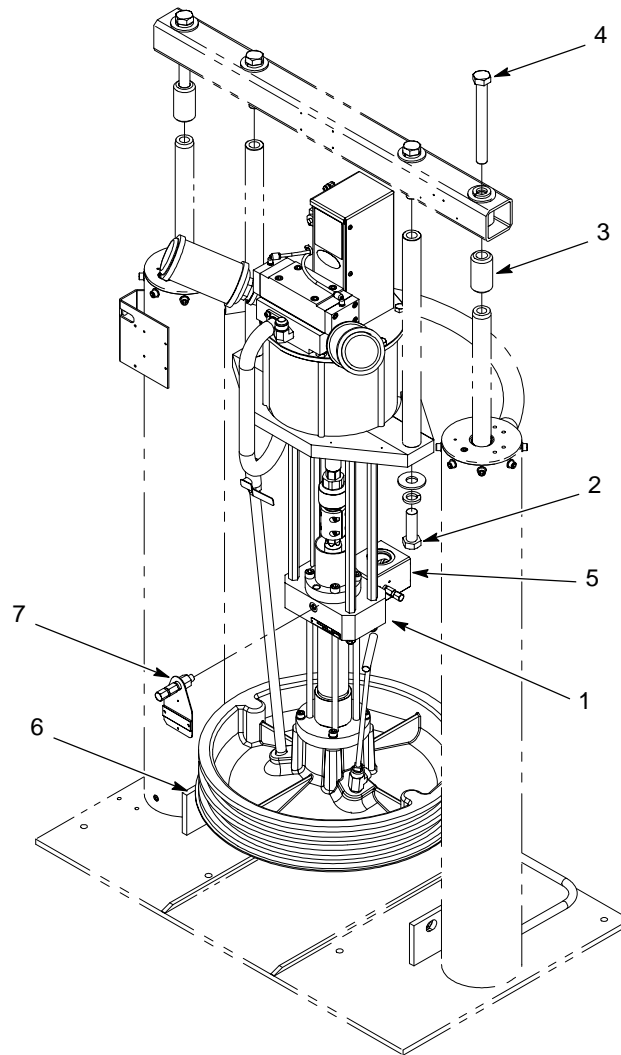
Rhino SD2/XD2 Conversion Kit Parts
